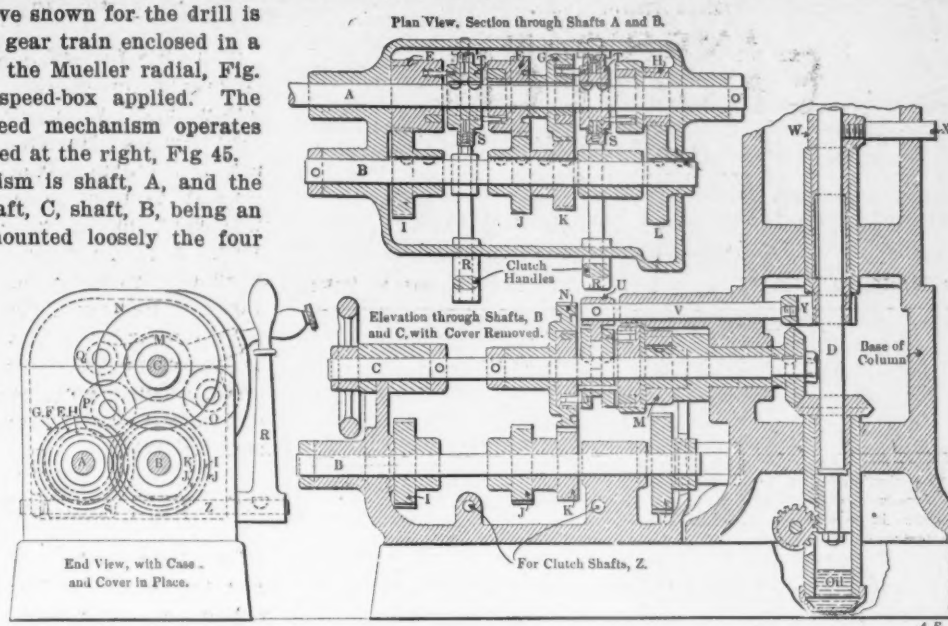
DETAILS OF THE VARIABLE-SPEED MECHANISM FOR THE MUELLER RADIAL DRILL.
